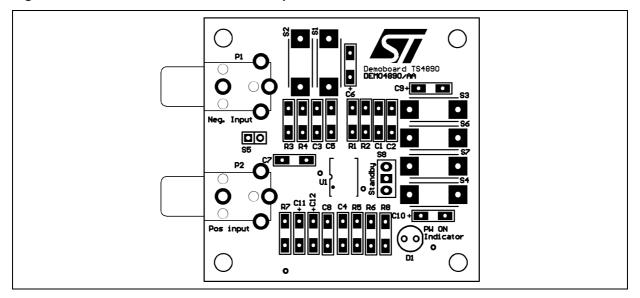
SO8 & MiniSO8 Demoboard Top Solder Layer
